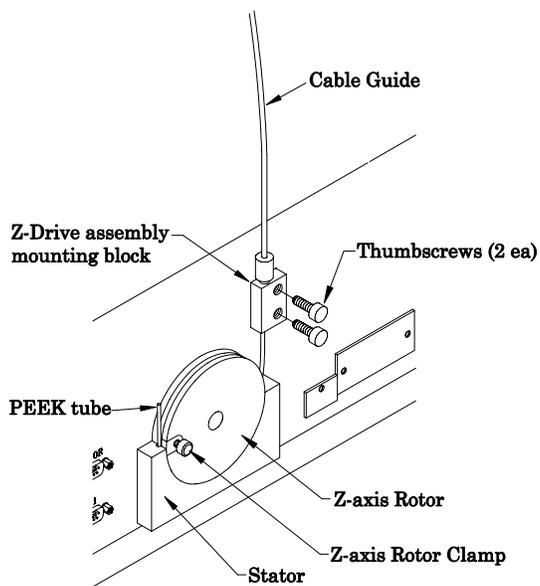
Back View of Autosampler Showing Z-Axis Rotor Groove and Mounting Block.
